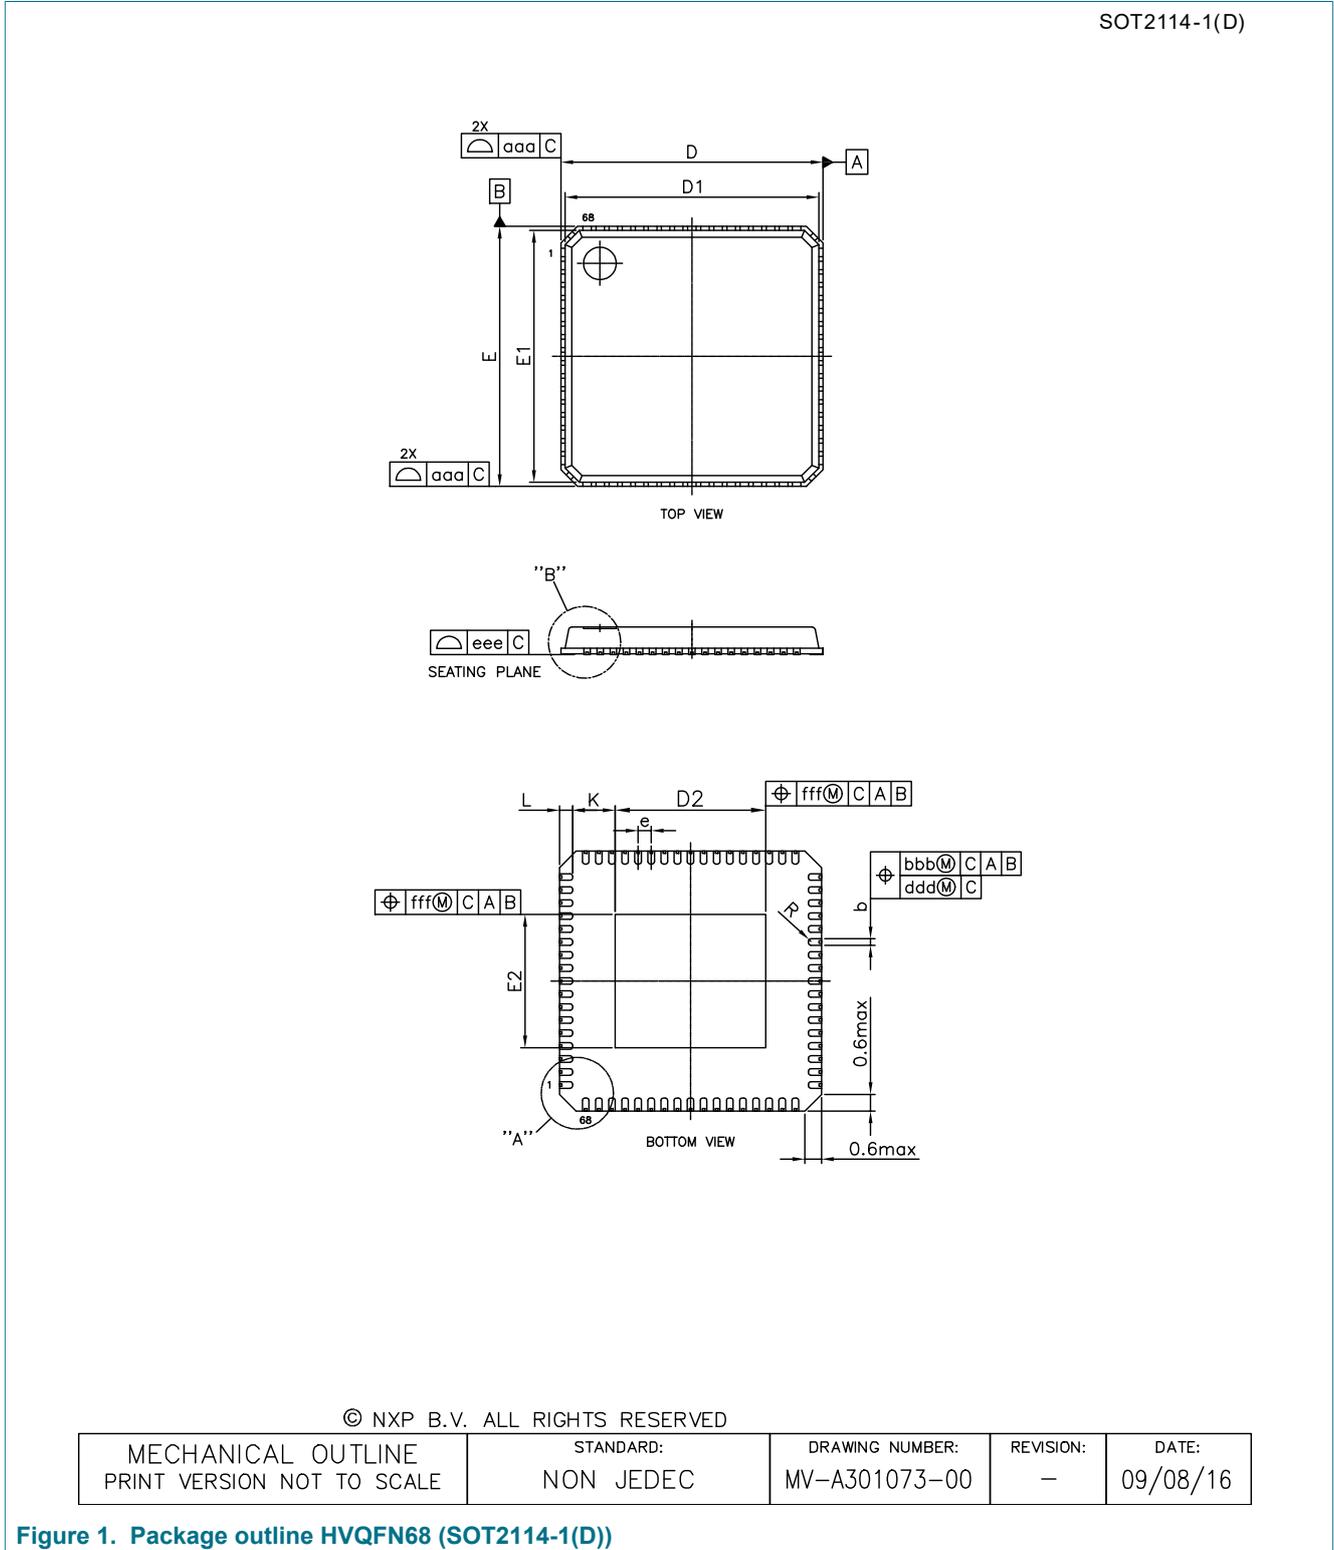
Package outline HVQFN68 (SOT2114-1(D))
